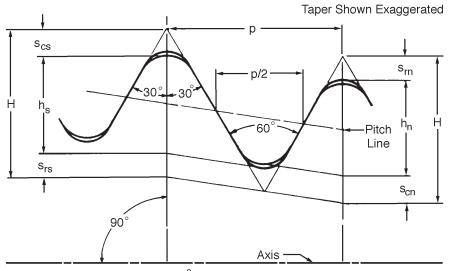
Casing Round Thread Form (See Table 4 or 4M for dimensions.)
